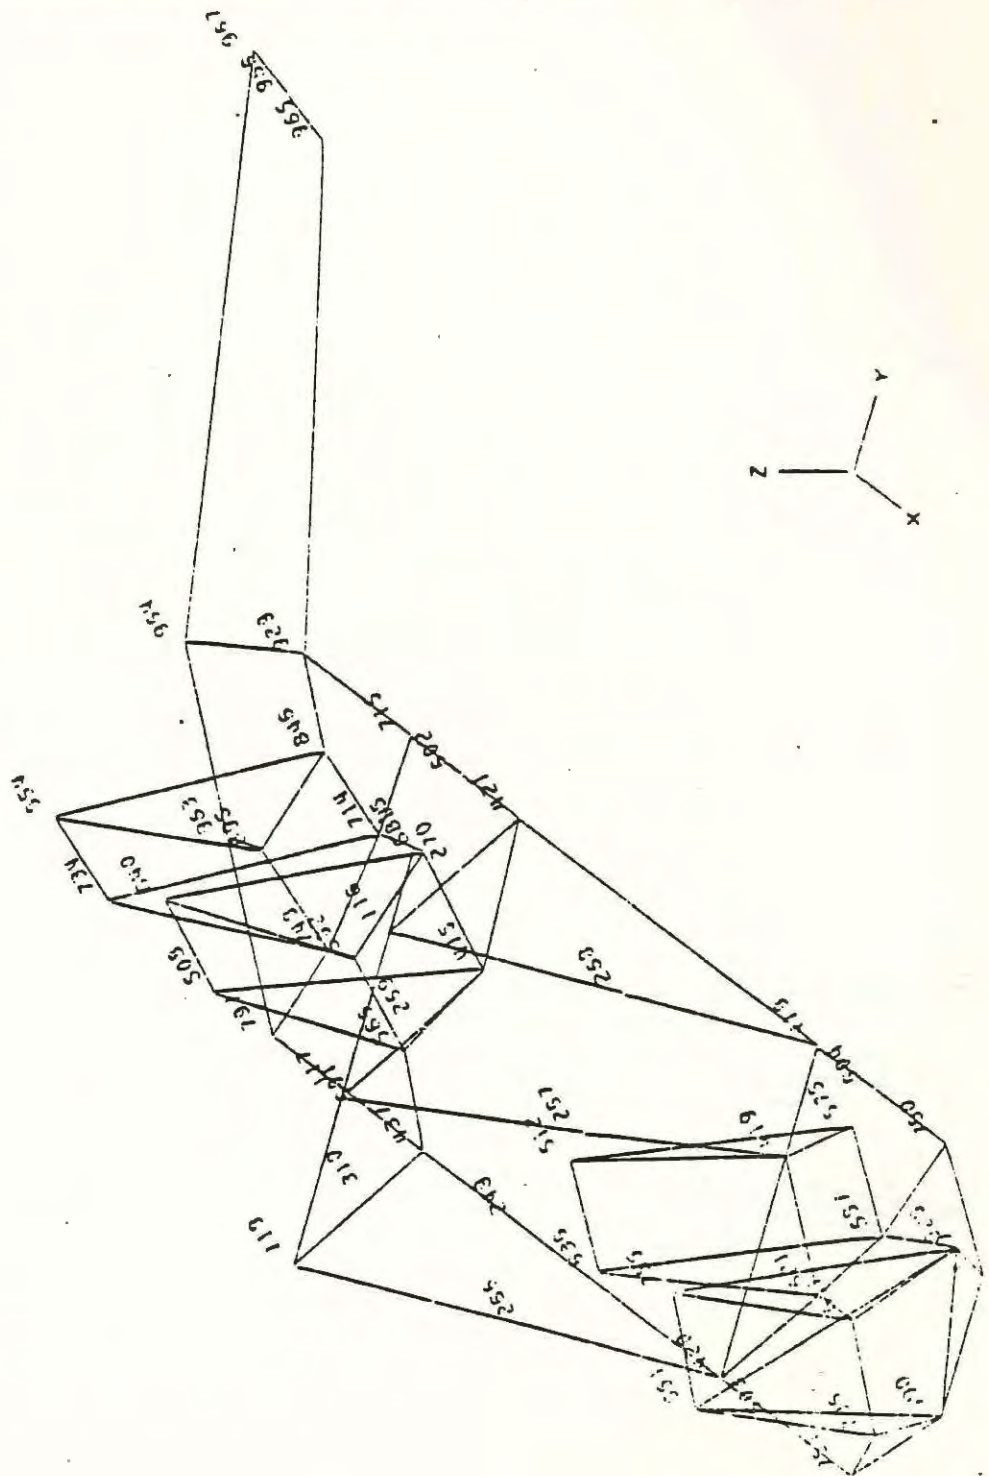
PRIMARY SPRING PADS - Steering Side; Element Groups 5,6,7,8.
